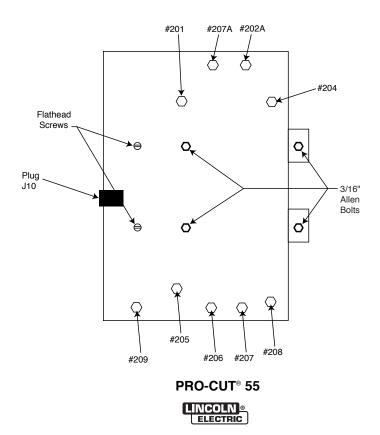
PRIMARY POWER BOARD REMOVAL
